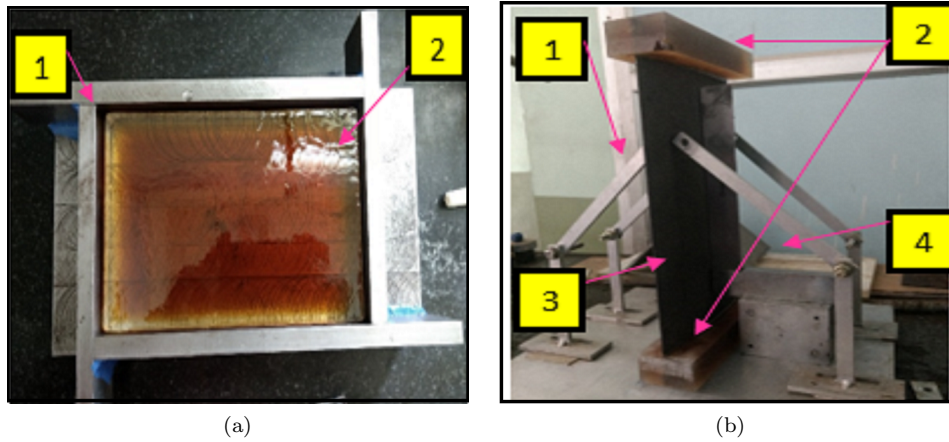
(a)Mould setup for end block (1) rectangular mould (2) mixture of resin and hardener
